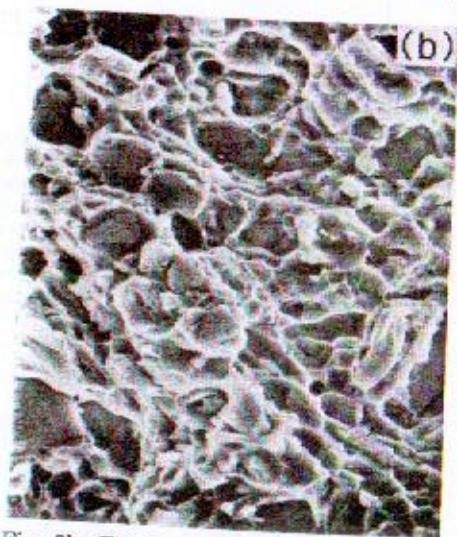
Fracture surface of 2618 Al + 15% SiC (T651).
